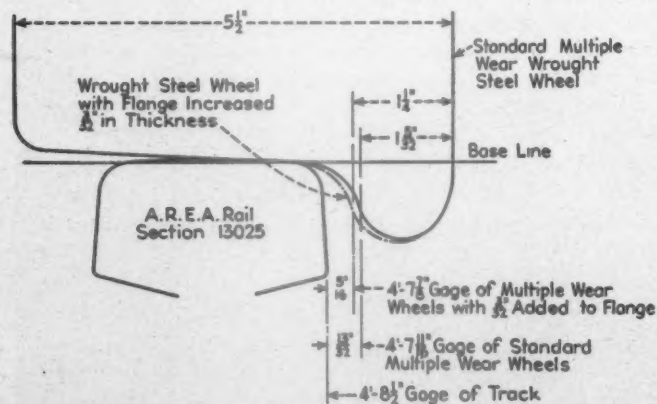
Position on rail of standard multiple-wear wrought steel wheel mounted to gage and same wheel with $\frac{3}{32}$ -in. of metal added to face of flange
